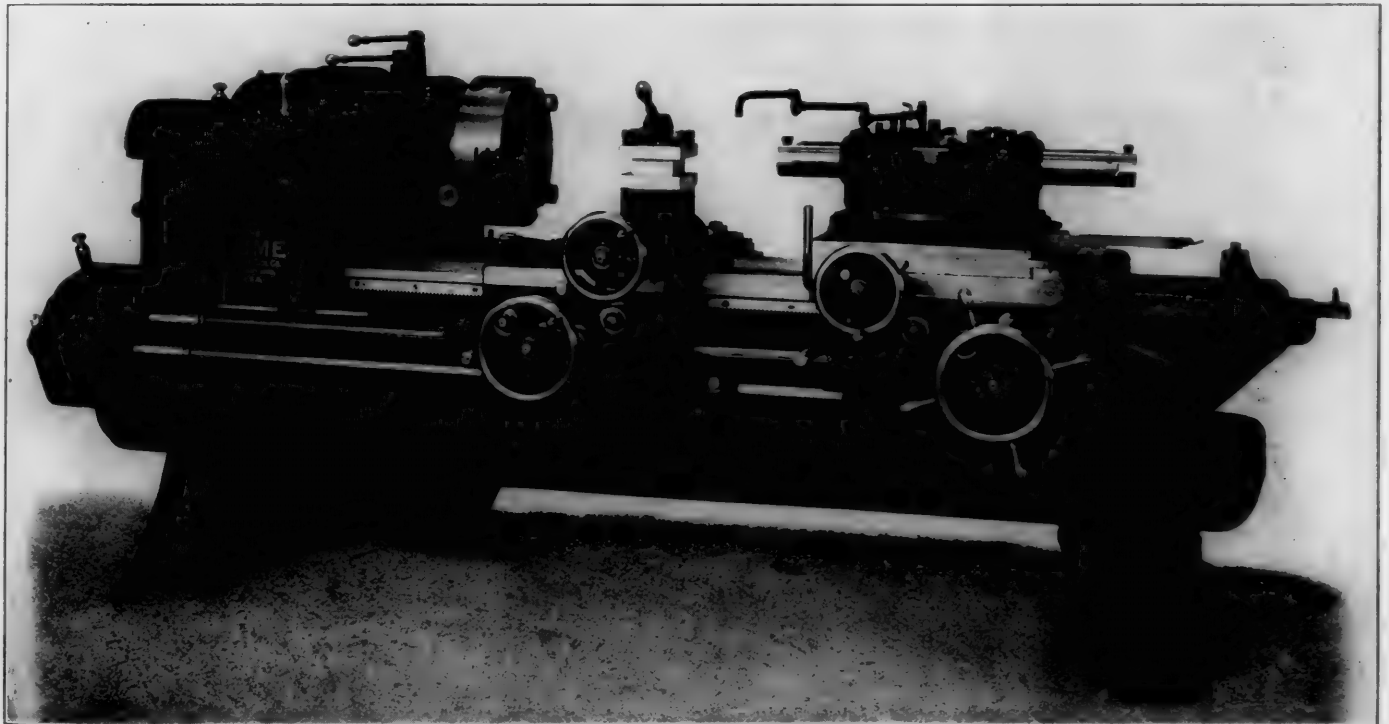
Cincinnati Acme No. 3 Universal Flat Turret Lathe
